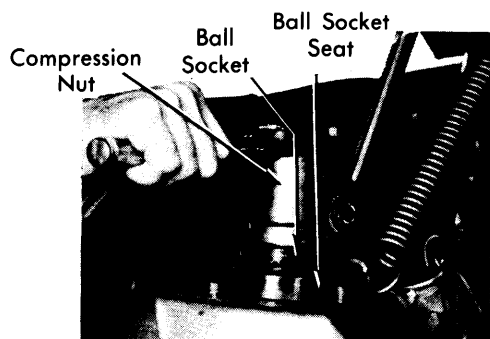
Installation of Coil Spring Compressor Tool in Upper Spring Opening
